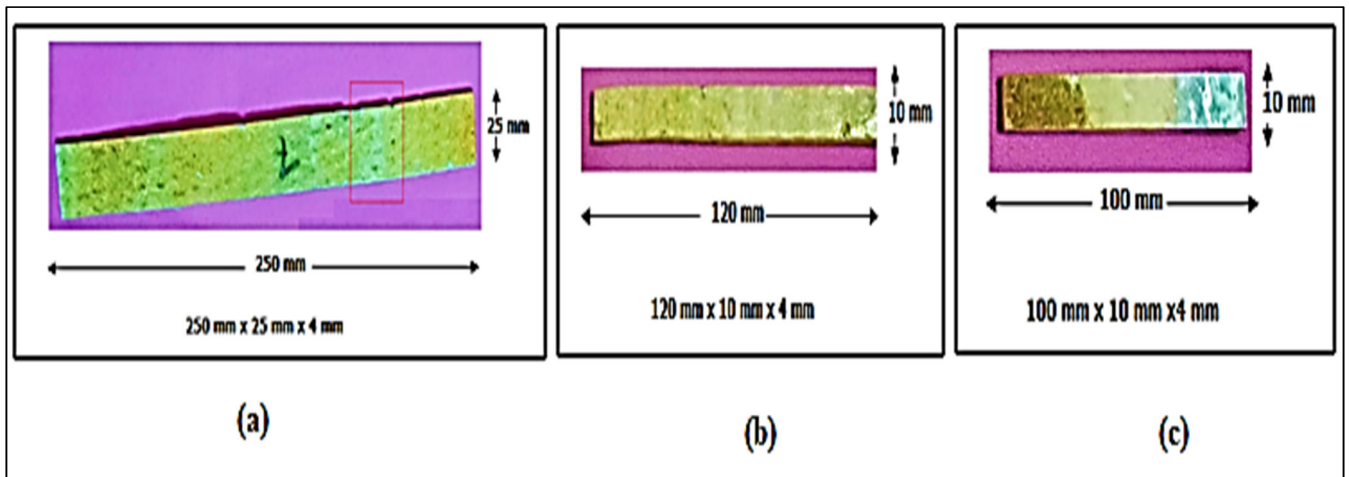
The dimensions of the test specimens adhered to ASTM standards [8].
